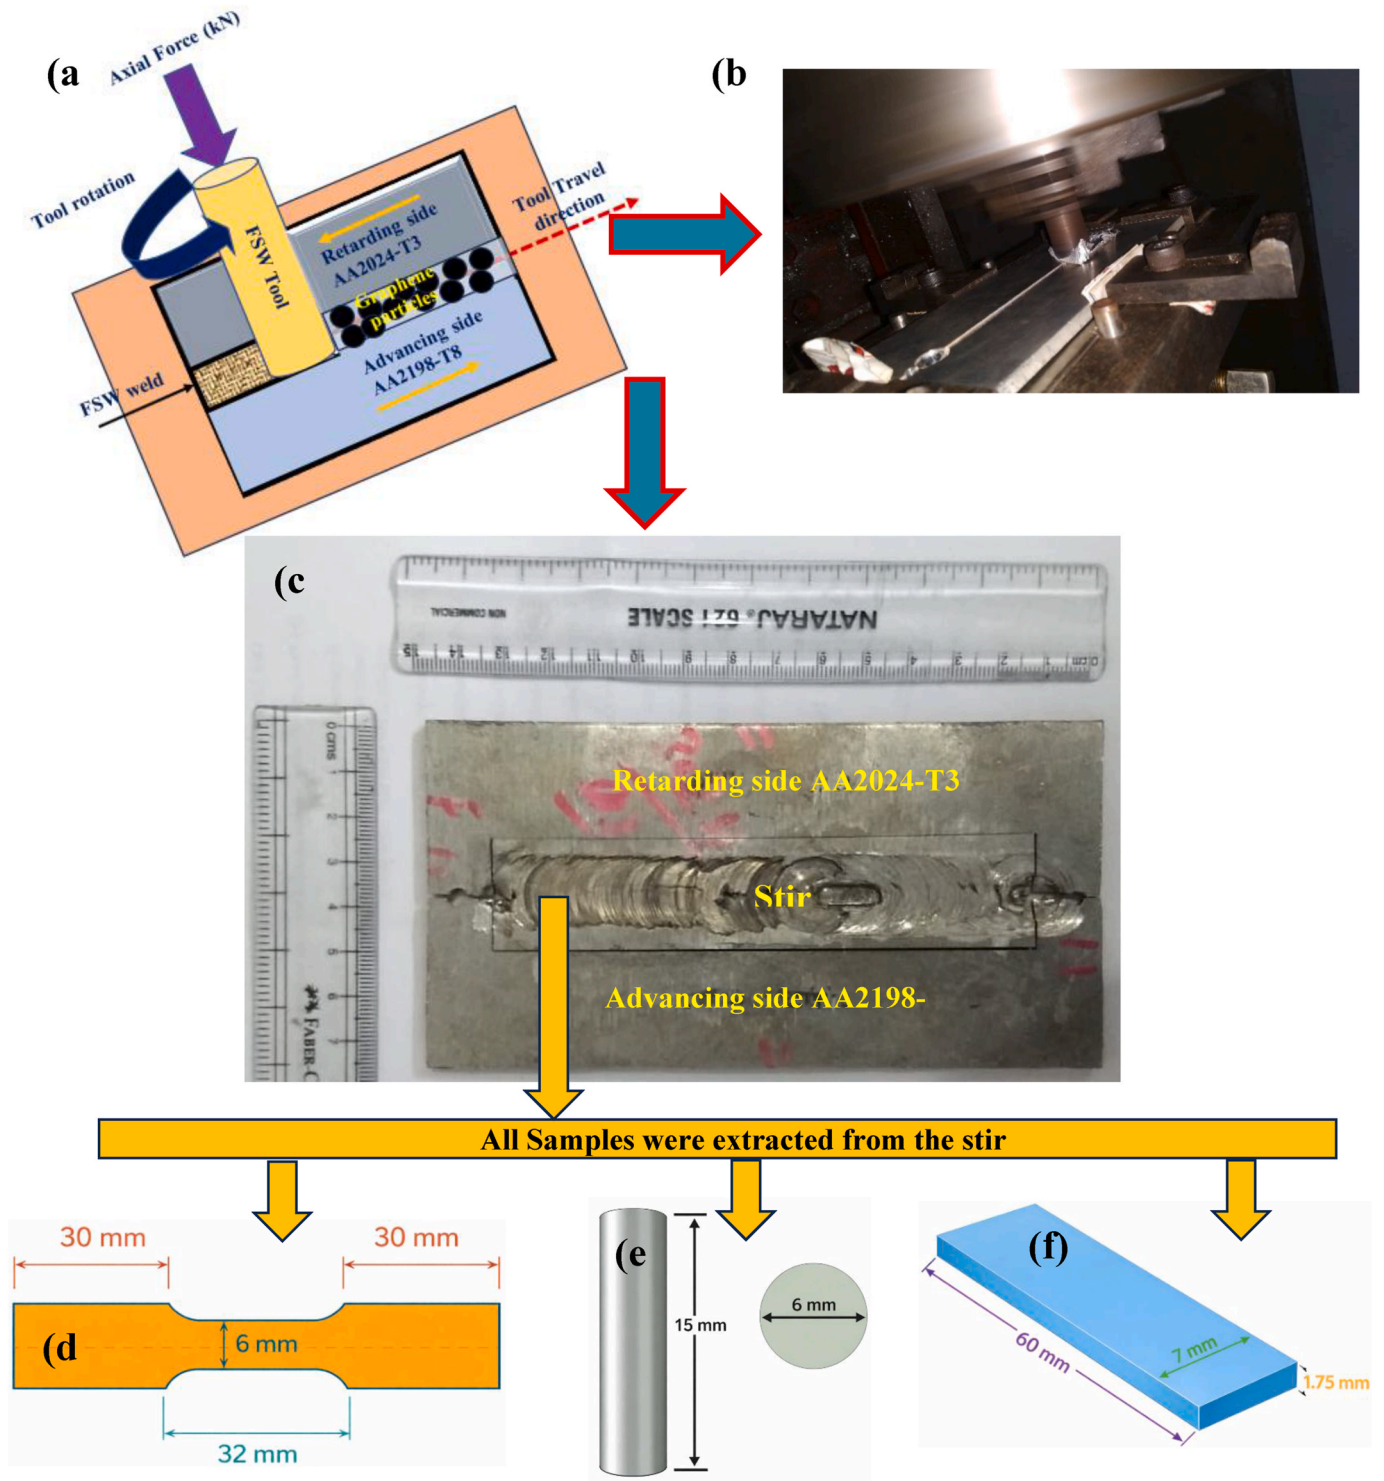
(a) Schematic diagram of friction stir-welding, (b) Experimental friction stir welding, (c) Friction stir welded plate, (d) Schematic diagram of tensile test, (e) Schematic diagram of wear test, (f) Schematic diagram of DMA test.
